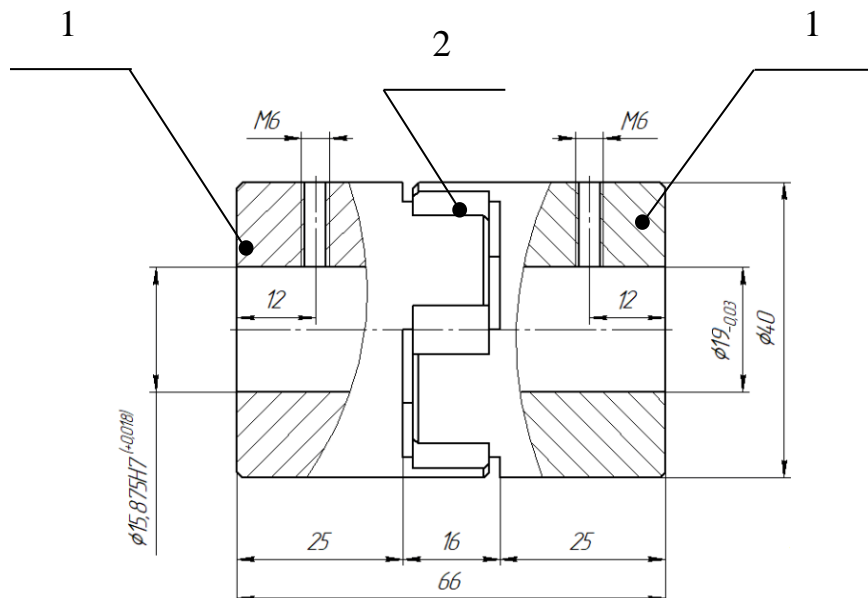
Diagram of the cam clutch, where 1 – coupling muff, 2 – ring gear
